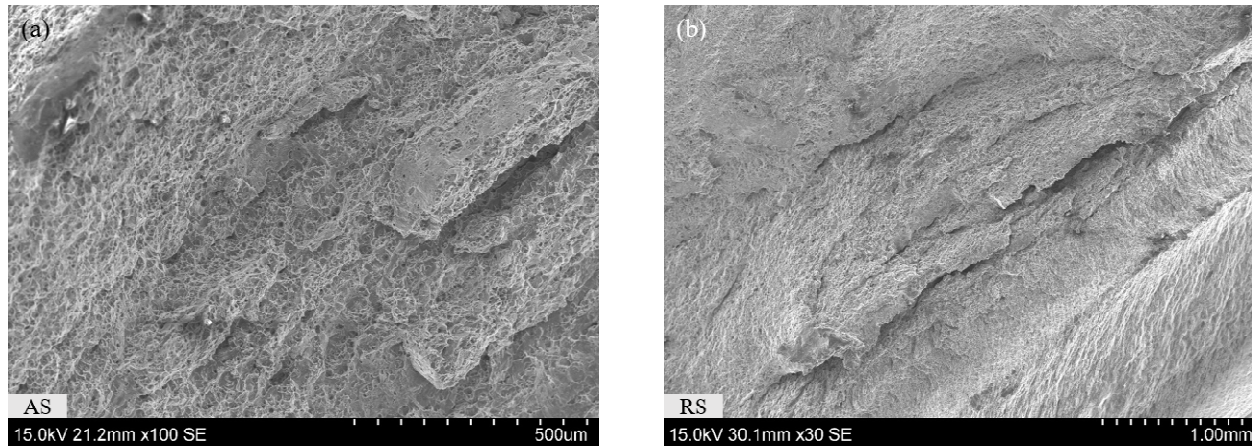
Fracture surfaces of FSW-10A showing brittle failure from the NZ.
